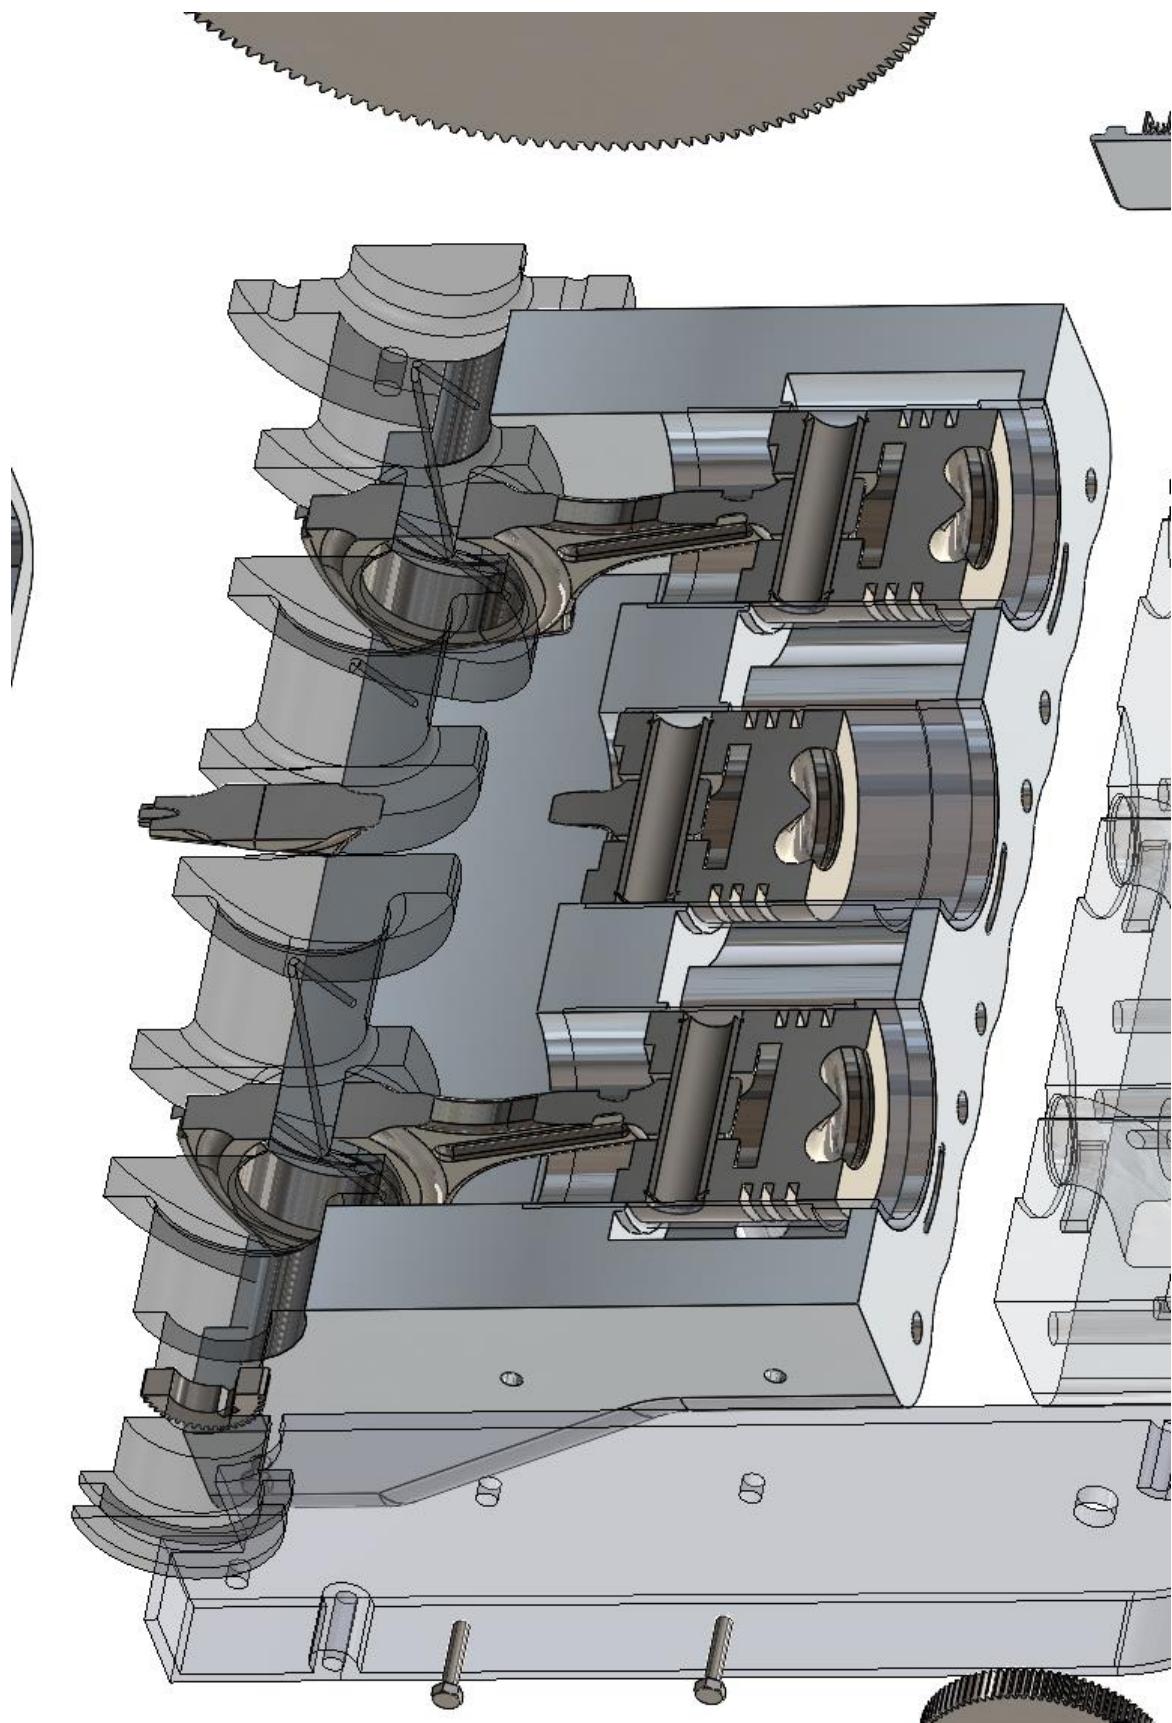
Section View of Detailed Exploded View of The Engine CAD Assembly.
